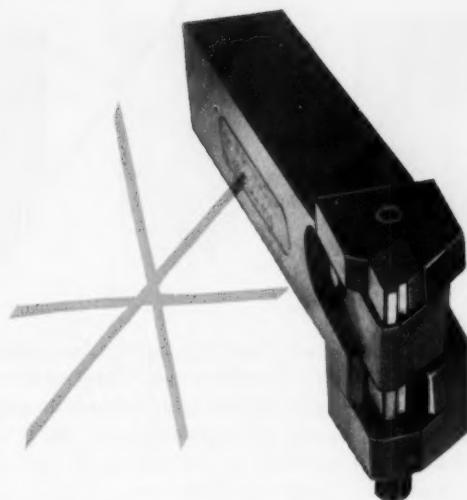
This on-end holder with specially shaped insert illustrates how the number of cutting edges can be reduced when forms are turned.
